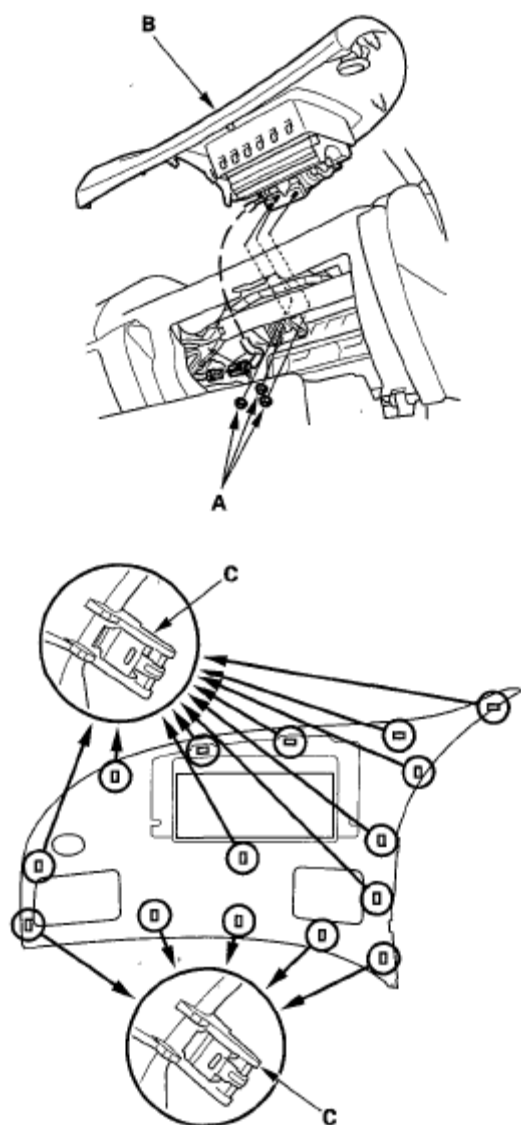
Identifying Front Passenger's Airbag Assembly, Mounting Nuts And Front Passenger's Lid Pawls
